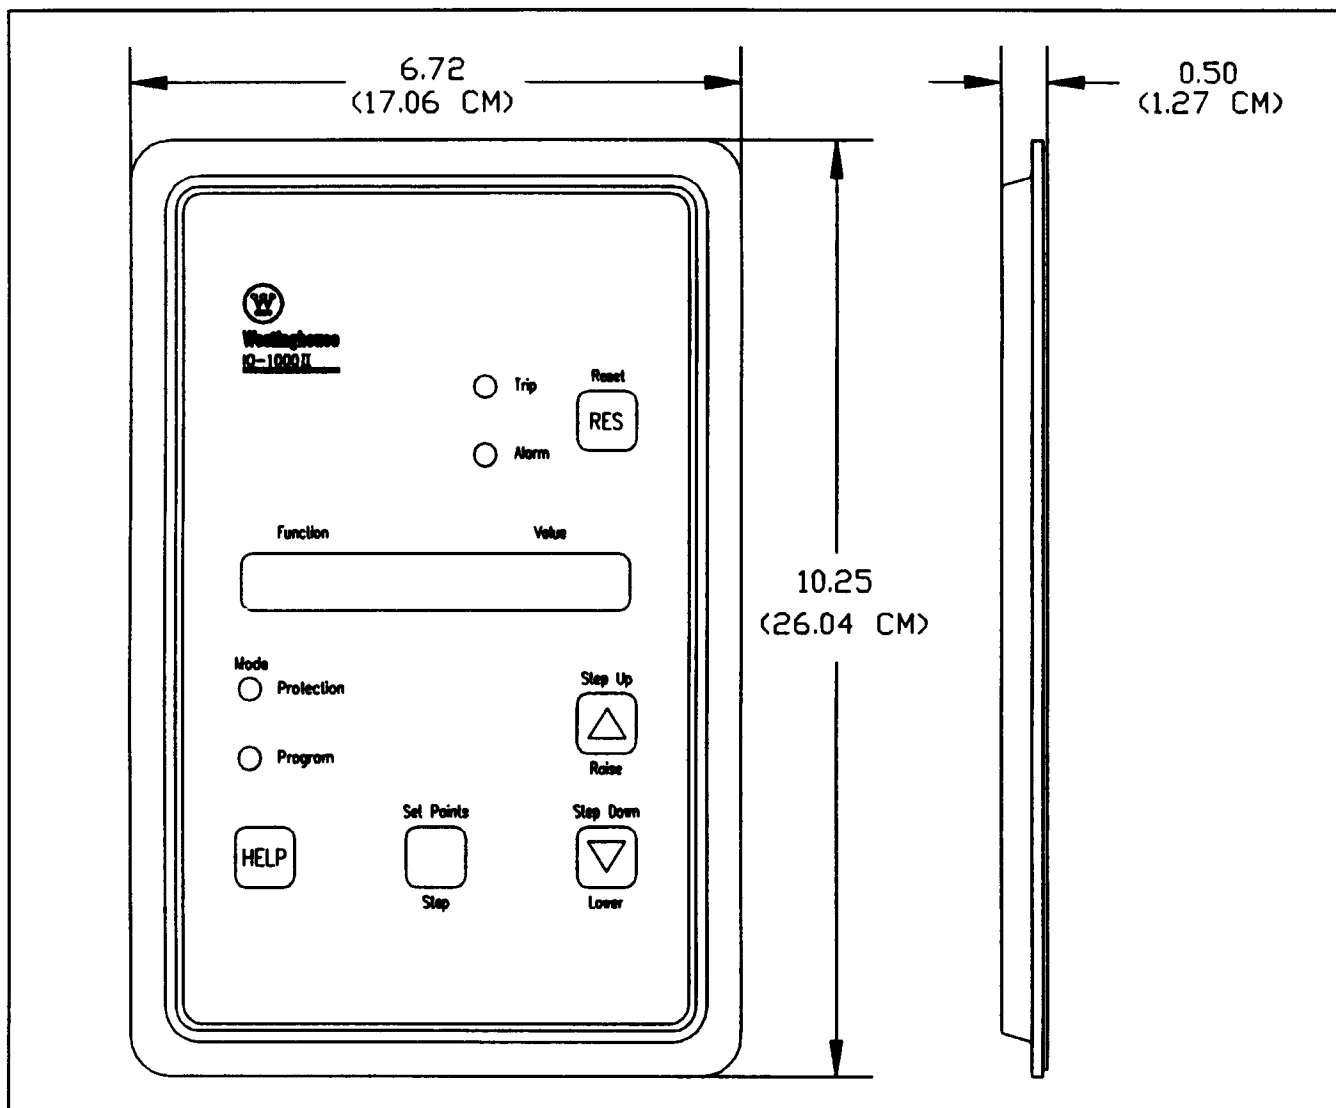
IQ-1000 II Faceplate Dimensions
